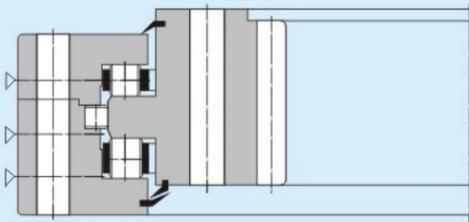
Three-row cylindrical roller combined bearing with internal gear
